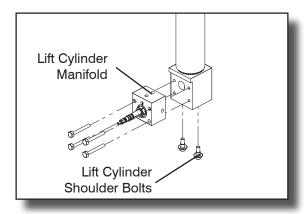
Lift Cylinder Manifold and Securing Bolts Removal
